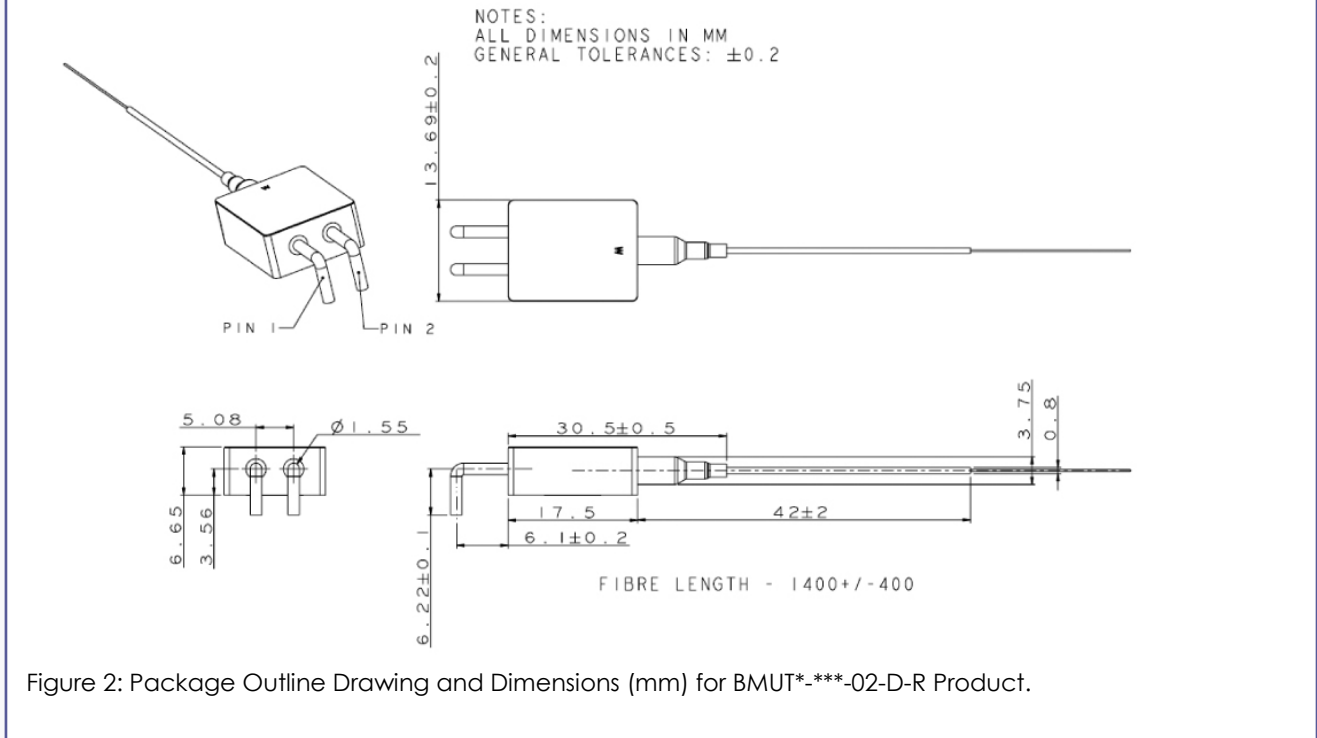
Package Outline Drawing and Dimensions (mm) for BMUT*-*-02-D-R Product.
